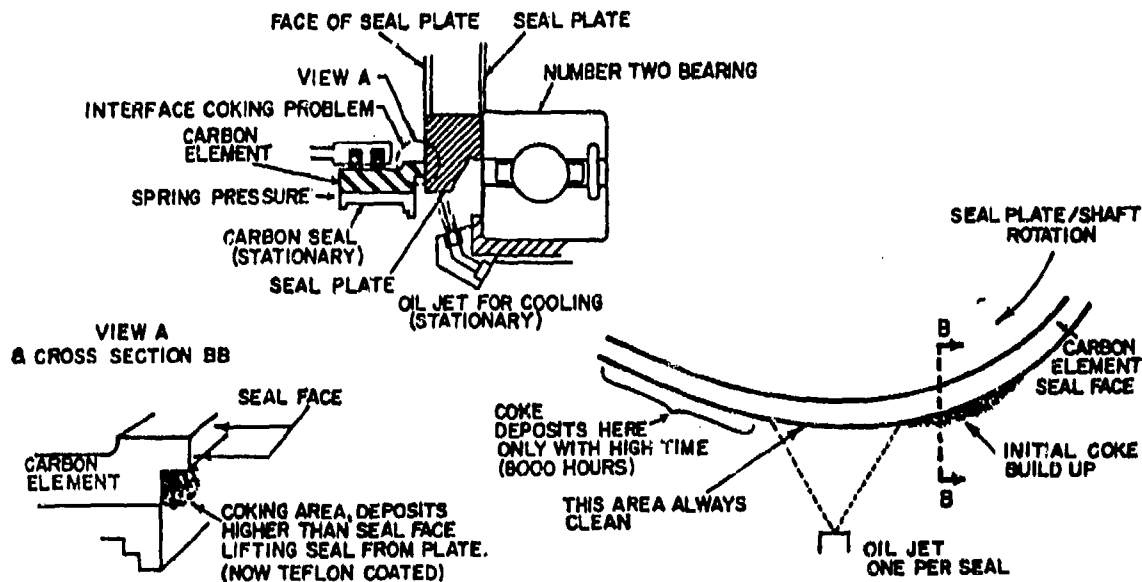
This sketch depicts a carbon coking problem in the main bearing carbon seal of a commercial turbo fan engine.
